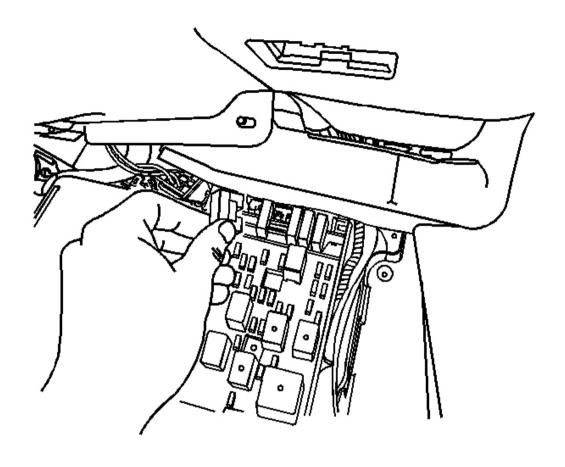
HDLP Maxi Circuit Breaker #54 To IP Electrical Center Courtesy of GENERAL MOTORS CORP.
